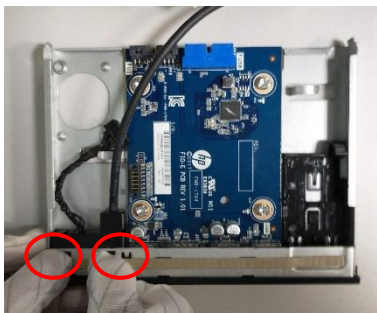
Release the front panel mount cable by push out 2 pins fixed black side in switch card tray.
